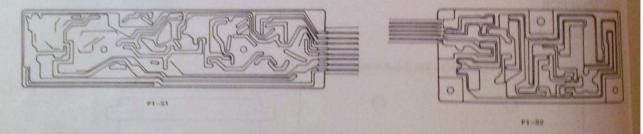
POWER SUPPLY CIRCUIT BOARDS VIEWED FROM PATTERN SIDE
